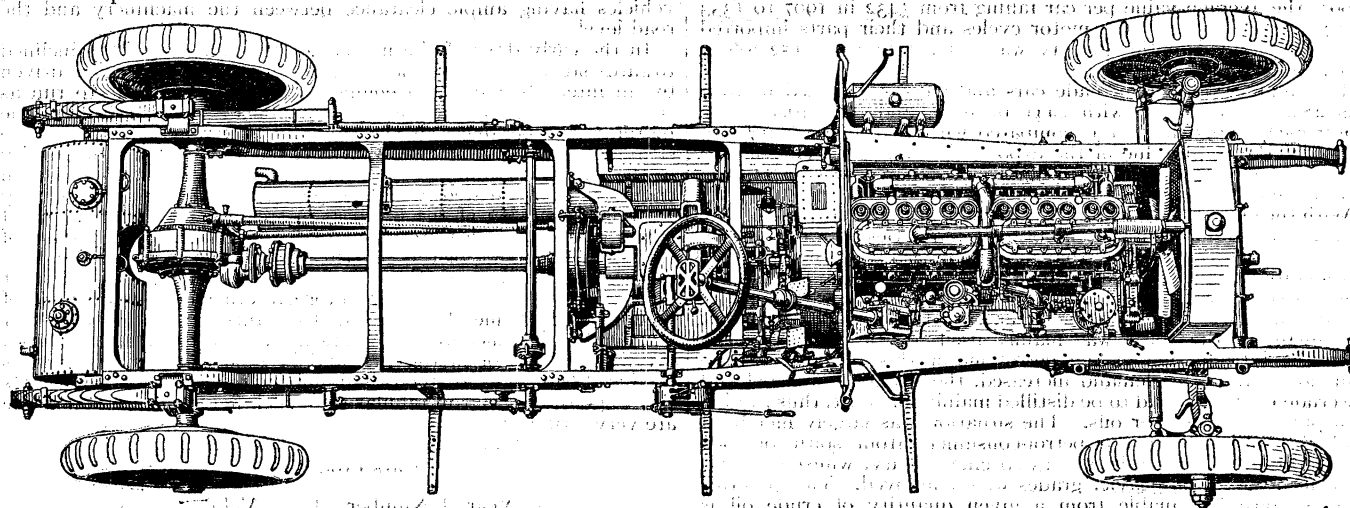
Plan View of the 40-50 h.p. Six-Cylinder Rolls-Royce Chassis (1910 type).
